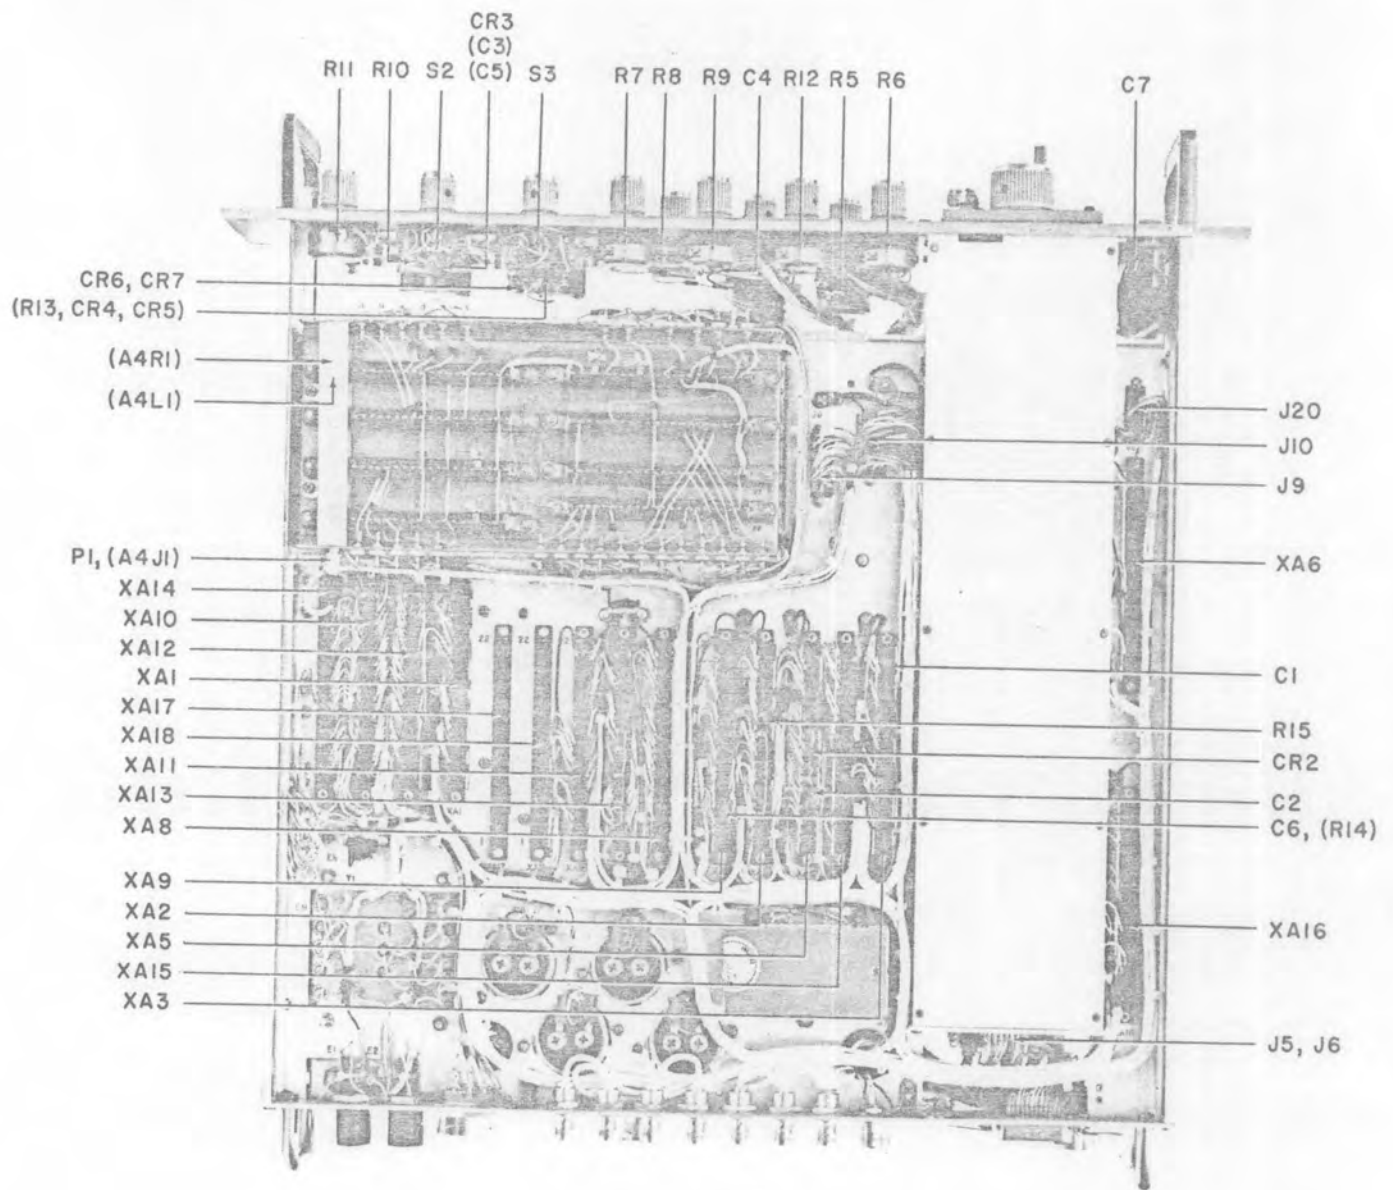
Type 215 Receiver Bottom View, Location of Components.
